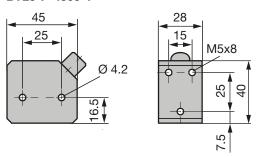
Installation dimensions of BTL5-P-4500-1 magnet
